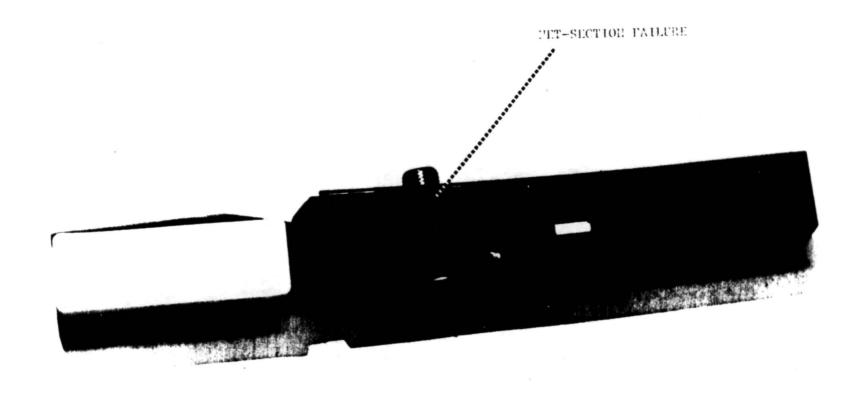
DOUBLE SHEAR TENSION TESTS - NET-SECTION FAILURE
